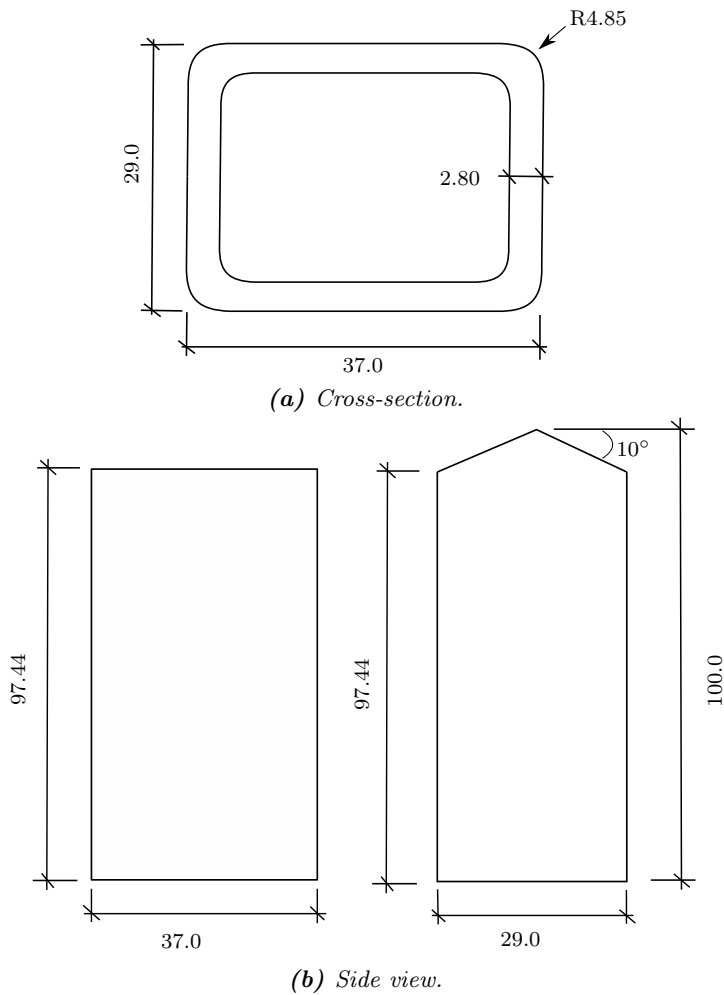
The nominal dimensions of the rectangular tube. Measures in mm.
